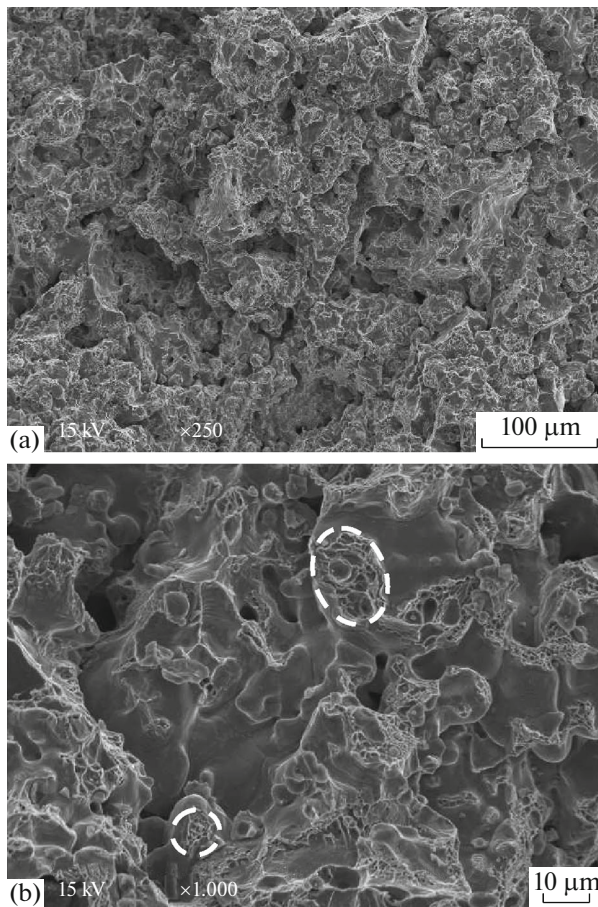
Fracture surface morphologies of sintered specimens: Magnifications are (a) 250 \times , (b) 1000 \times .
